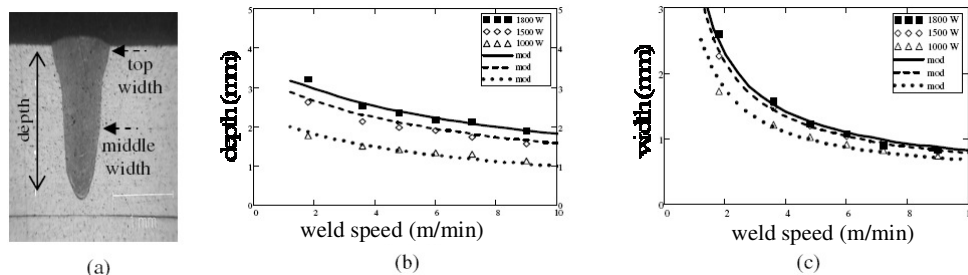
(a) Weld cross section view. Model (lines) and experimental results (symbols) for weld depth (b) and top weld width (c) as function of welding speed for laser powers of 1000 W, 1500 W and 1800 W.
